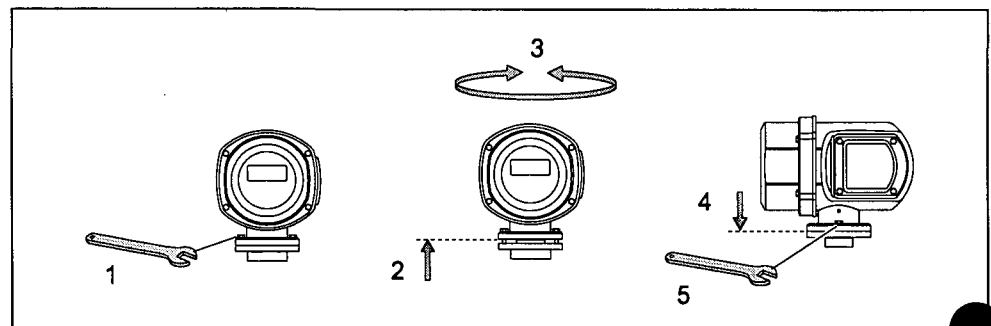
Turning the transmitter housing (stainless-steel field housing)
